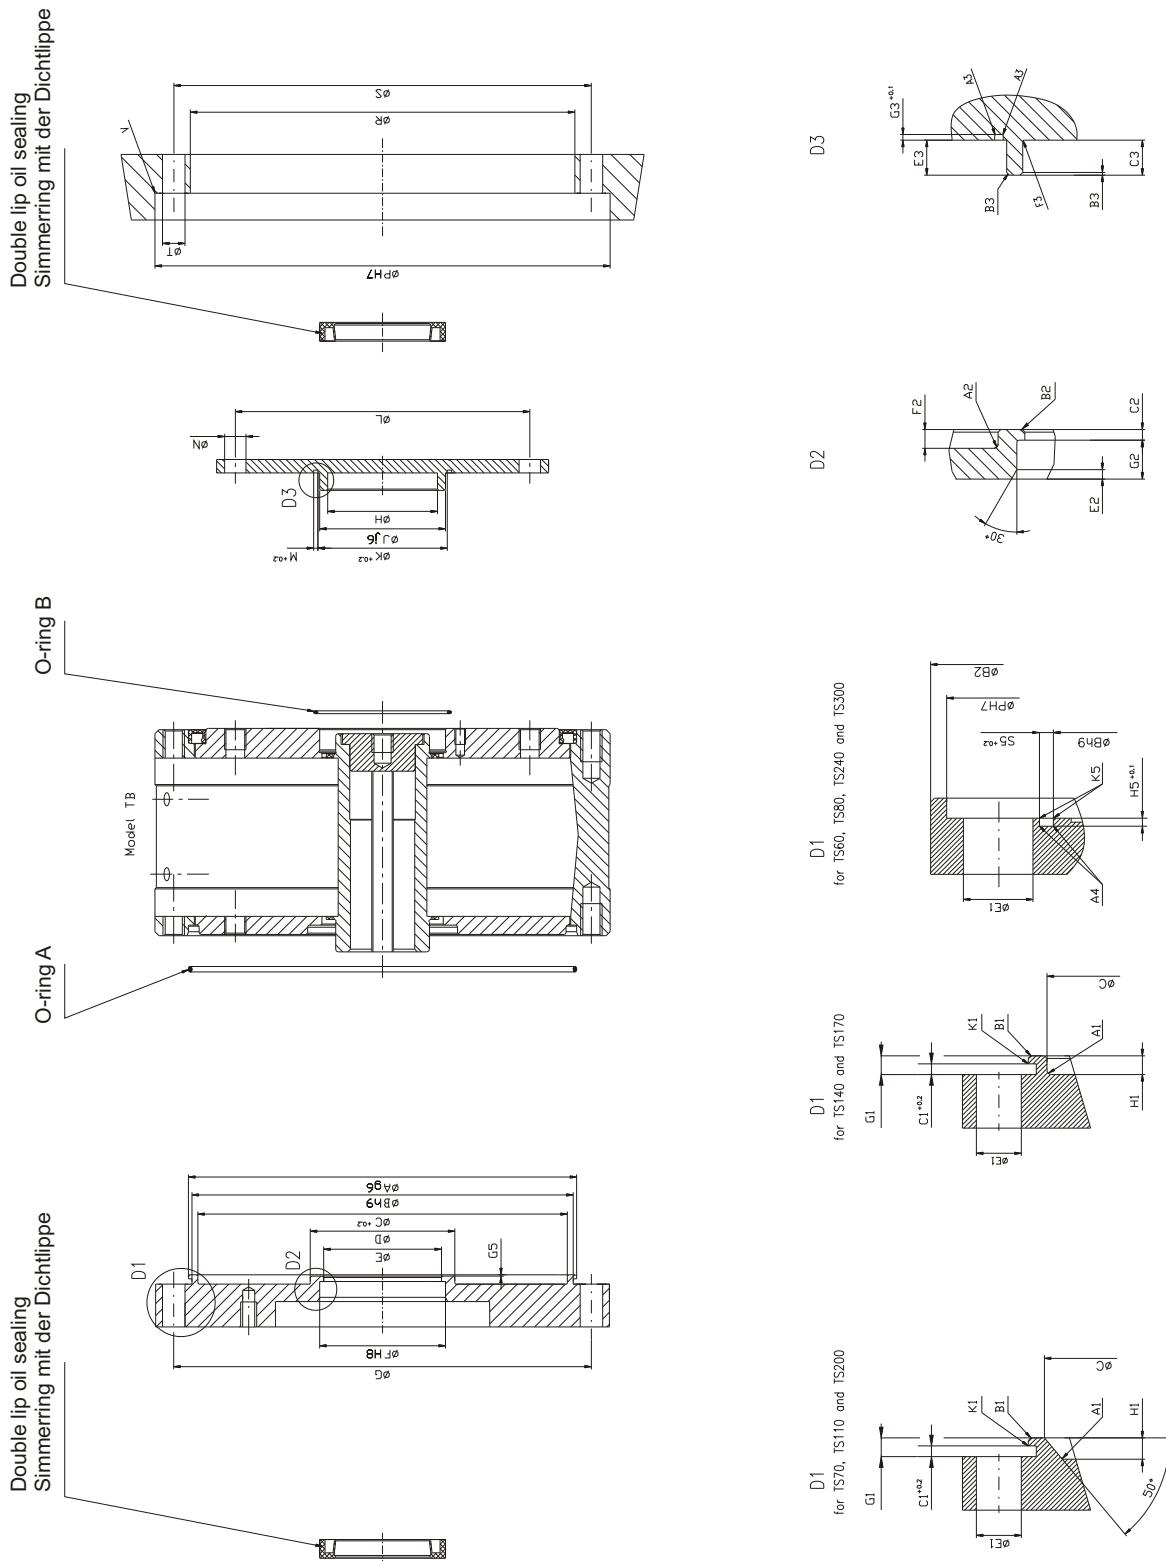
Dimensions for input and output flanges of TwinSpin bearing reducer series T up to TS 200/
